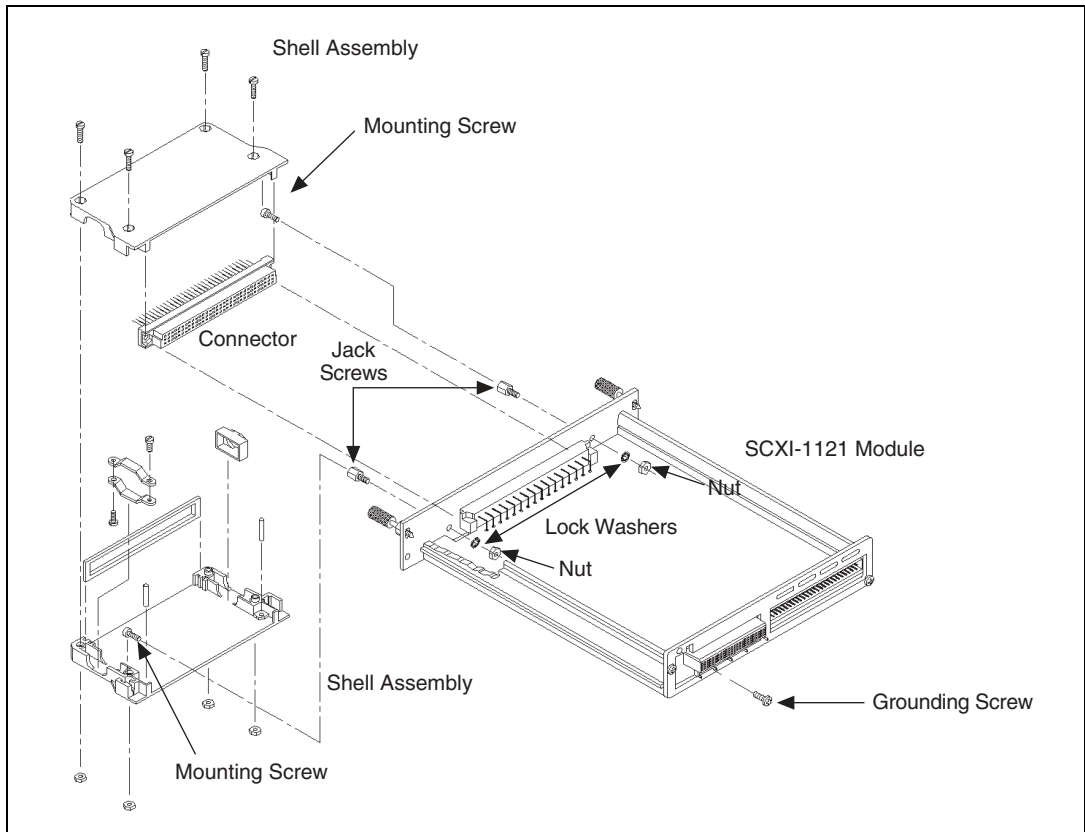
Assembling and Mounting the SCXI-1330 Connector-and-Shell Assembly
